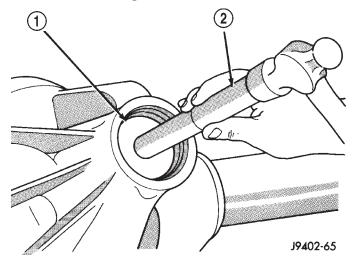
Pinion Outer Bearing Cup Installation 1 - INSTALLER 2 - HANDLE
